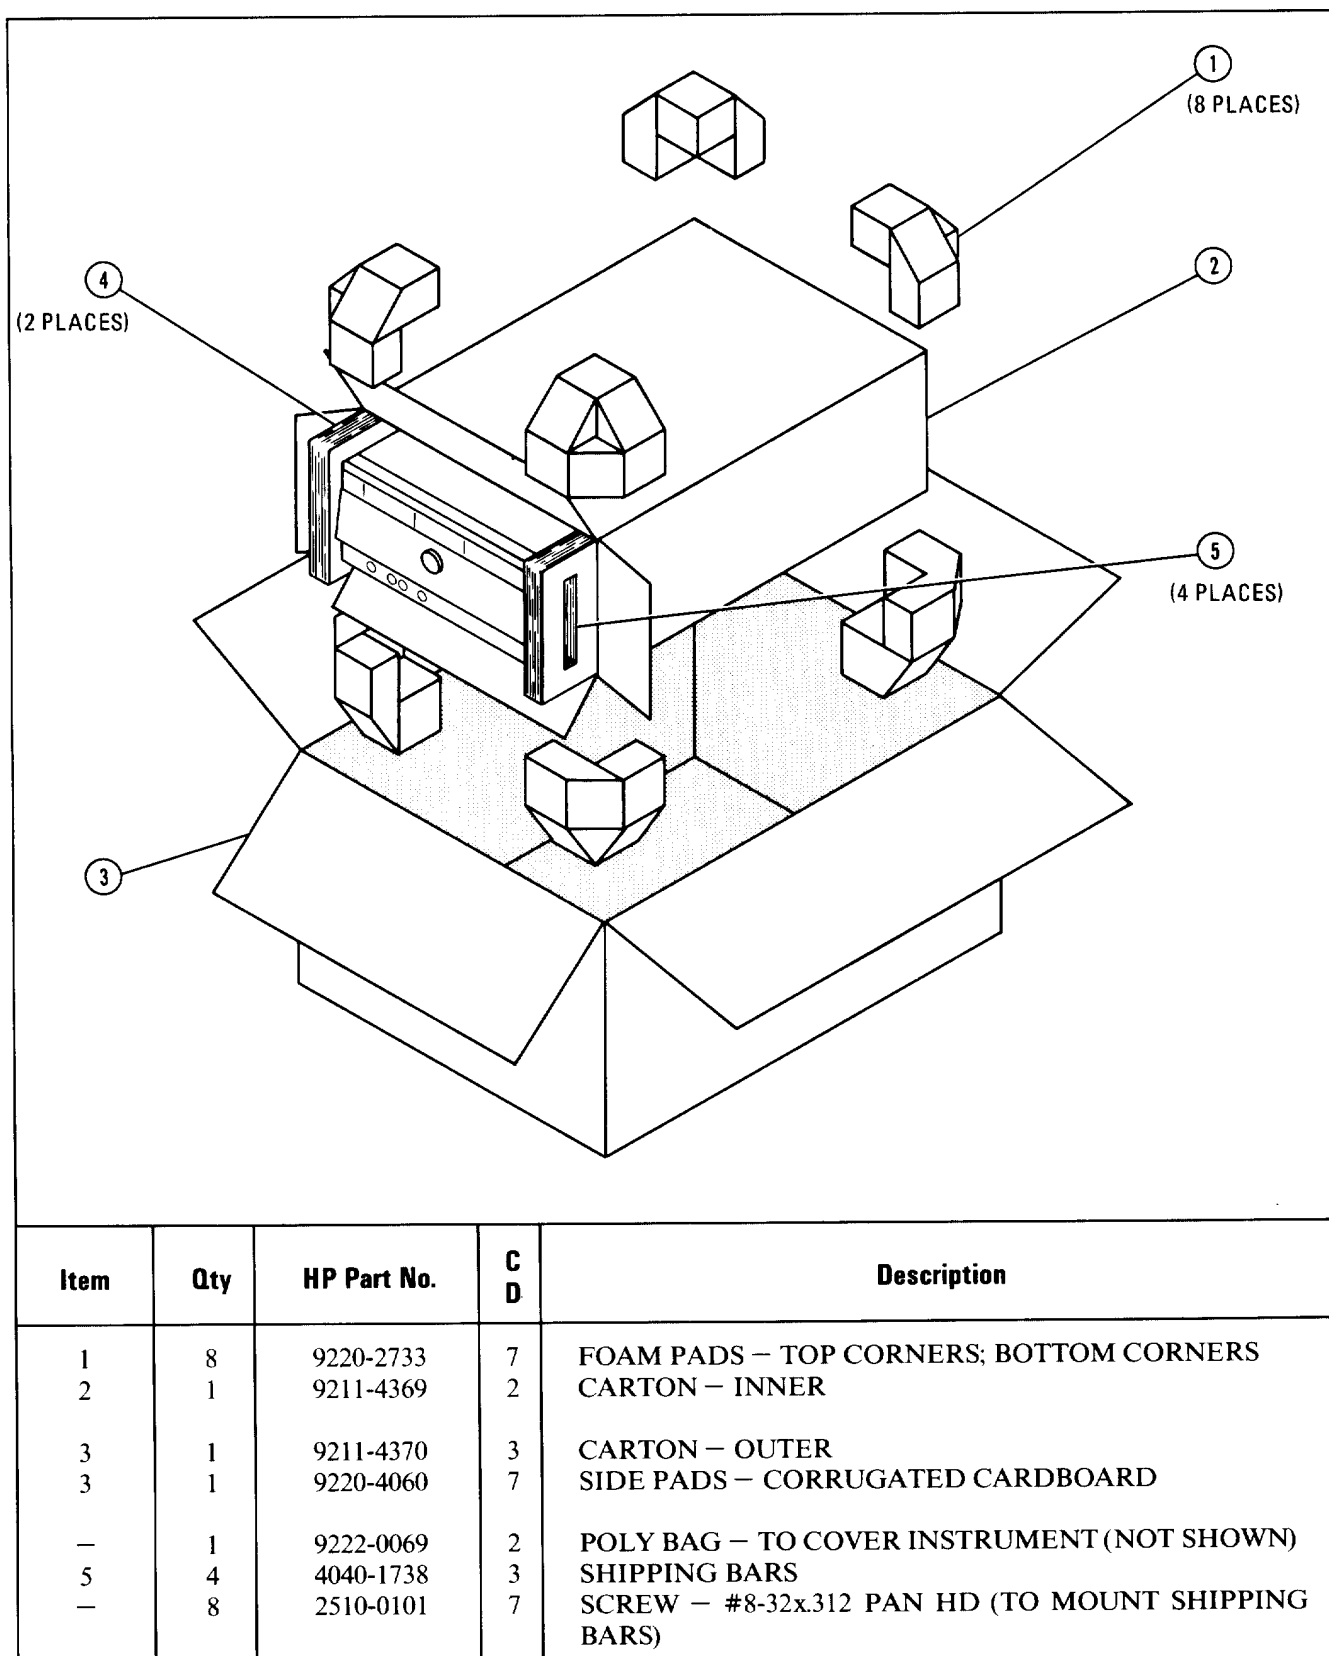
Packaging for Shipment using Factory Packaging Materials
